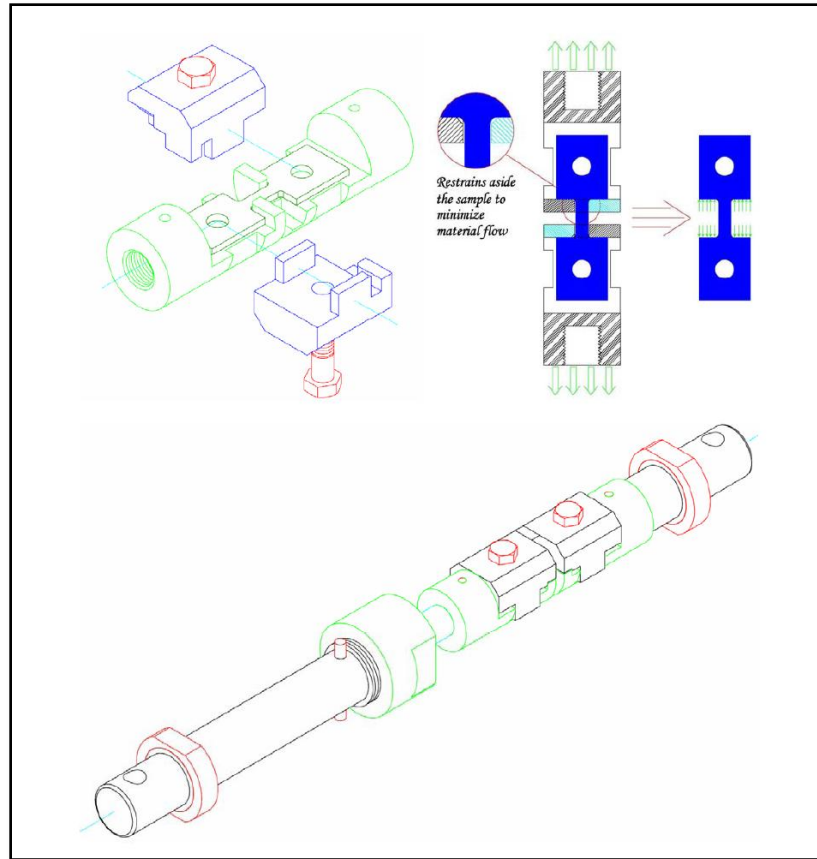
Tensile specimen gripping for SPF testing of Mg AZ31 (9)
